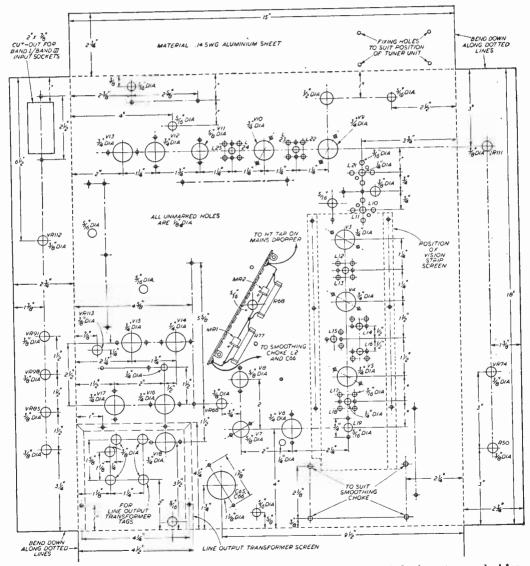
Drilling details of the chassis, viewed from above (dimensions of the interstage and vision I.F. screens will be given next month together with hole spacings for the I.F. transformer).
